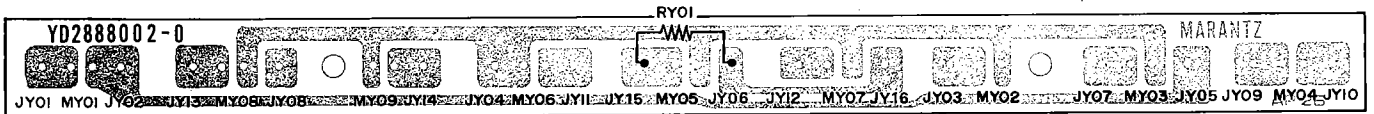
Indicator Lamps Assembly PY01 Component Locations
